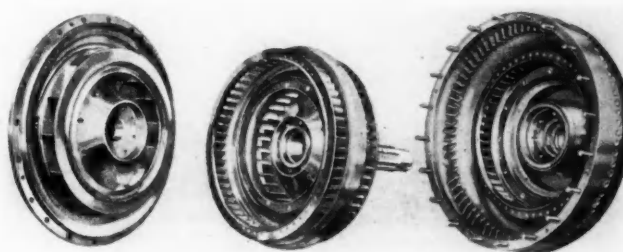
Major Component Parts of the Hydraulic Mechanism
